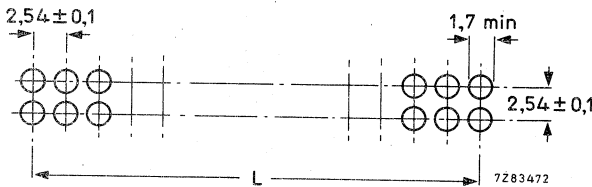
Hole pattern for double-row bottom-entry sockets; see Table 1 for dimension L.
